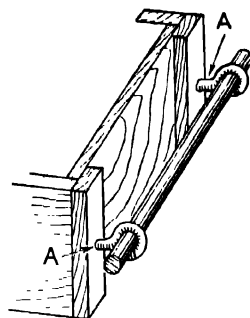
LARGE SCREW-EYES USED FOR ROLLERS.
